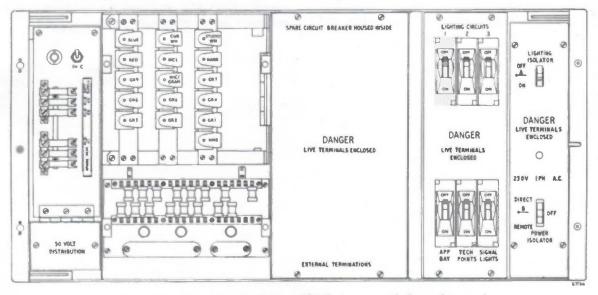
Power Supply Cabinet PSC/2: Layout with Doors Removed
